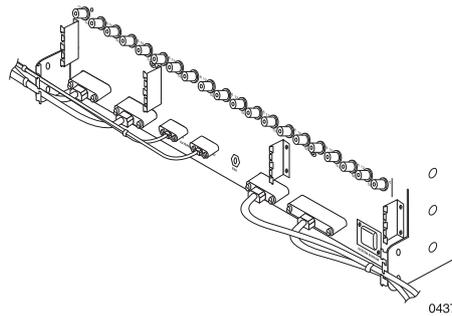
External Timing Cable Routing at the Rear of the Chassis
